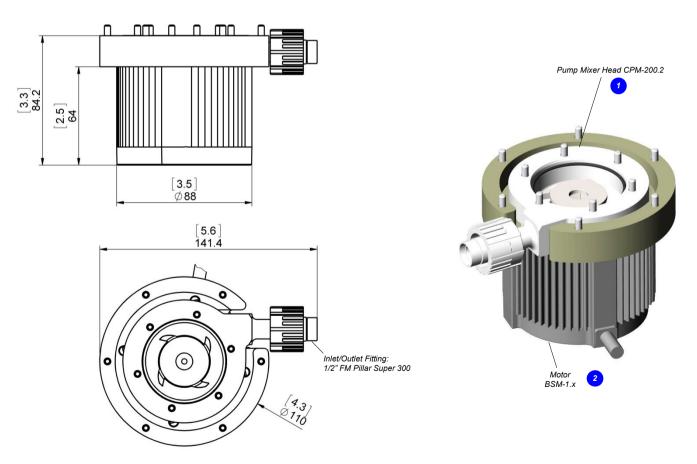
Basic dimensions of motor BSM-1 with pump mixer head CPM-200.2
